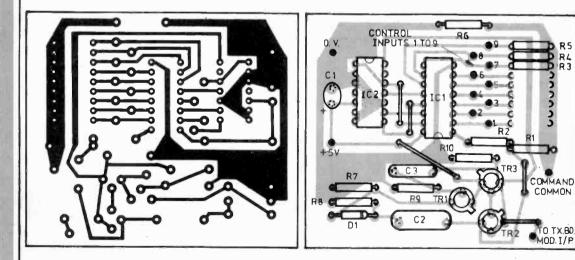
Printed circuit master and component layout details for the Coder (full size)
